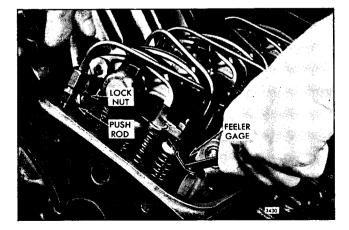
Adjusting Valve Clearance (Spring-Loaded Valve Bridge)
